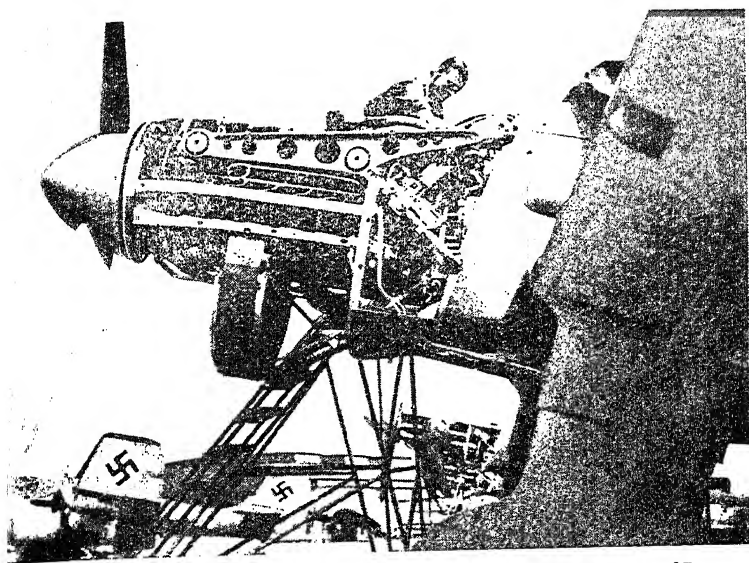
ENGINE BEARER FORGING (ELEKTRON); JUNKERS 87 MACHINE; JUNKERS JUMO J.U.211 1000 H.P. ENGINE
